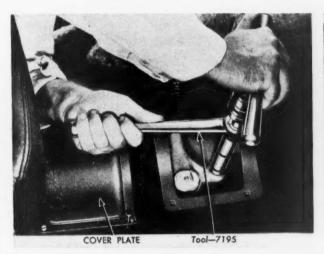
Special tool in position for tightening the rearband adjusting screw. Done from inside the car.
